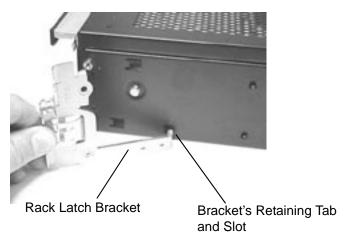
Connecting the Left-side Mounting Bracket to the System's Chassis
